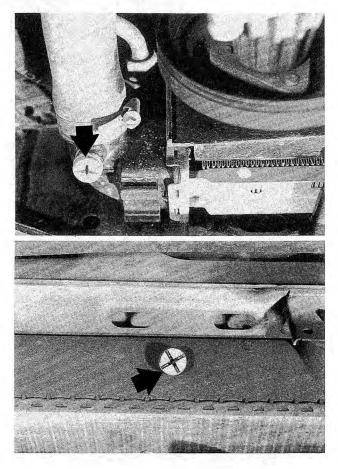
Location of radiator drain plug on 6-cylinder engine (top arrow) and 4-cylinder engine (bottom arrow).
